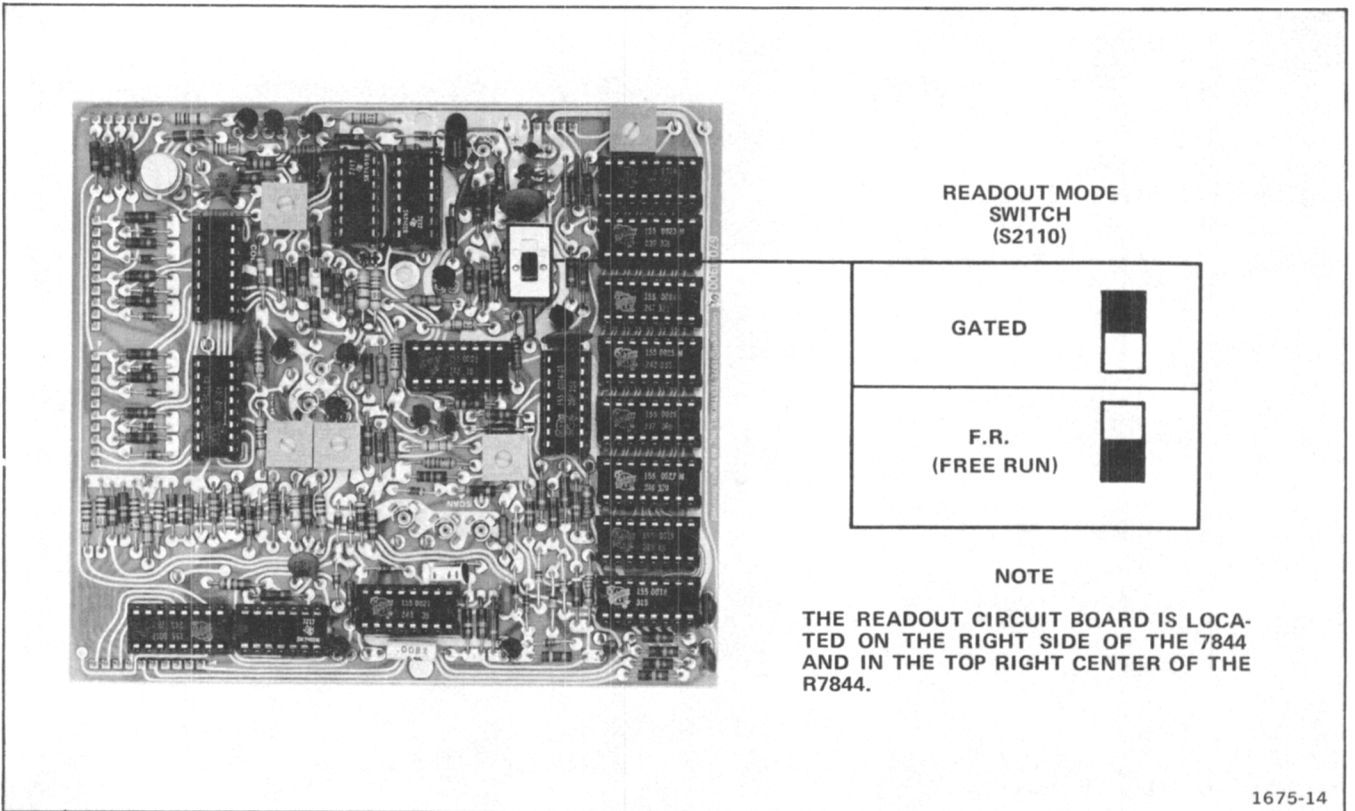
Location of Readout Mode Switch on Readout circuit board.
